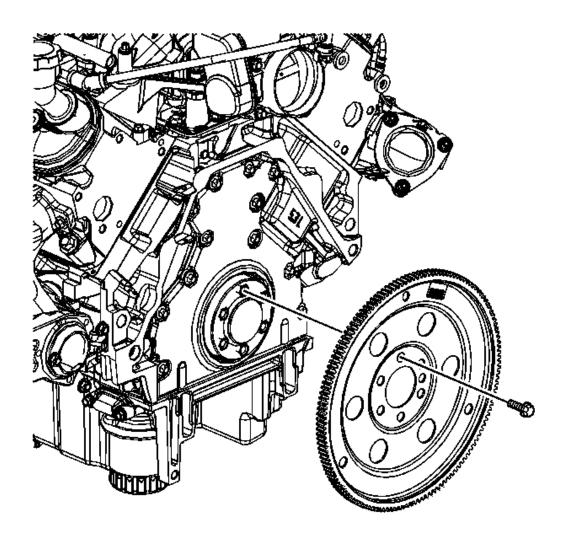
Identifying Flywheel Courtesy of GENERAL MOTORS CORP.
